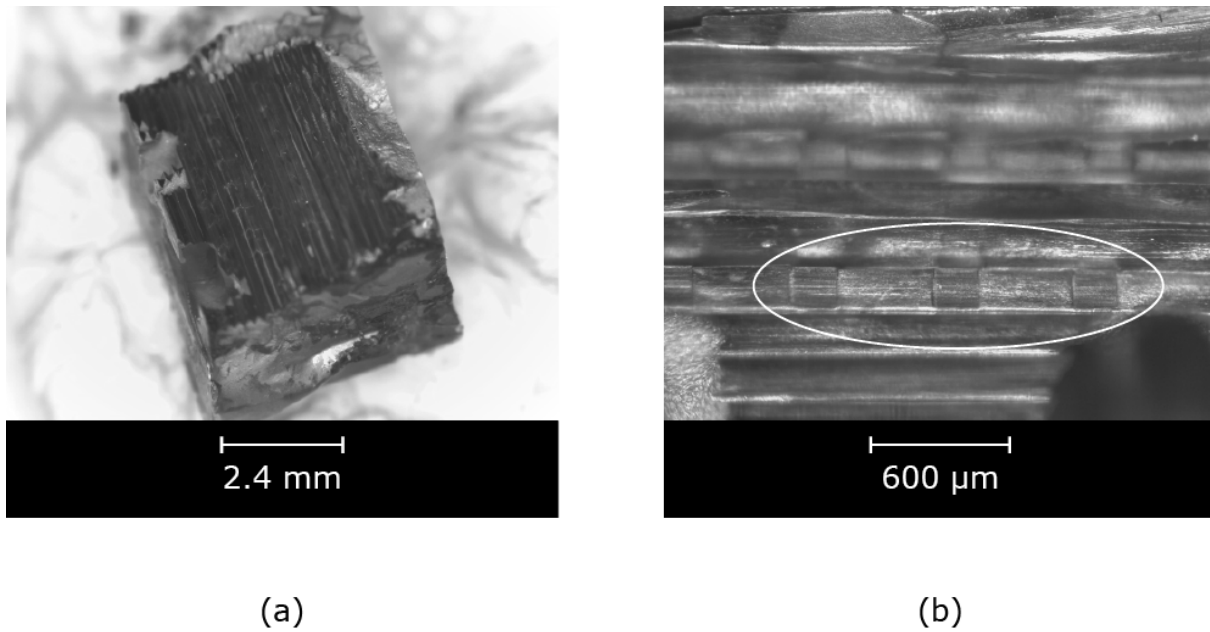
Second prototype after tips dicing. (a) Perspective view, (b) side view.
